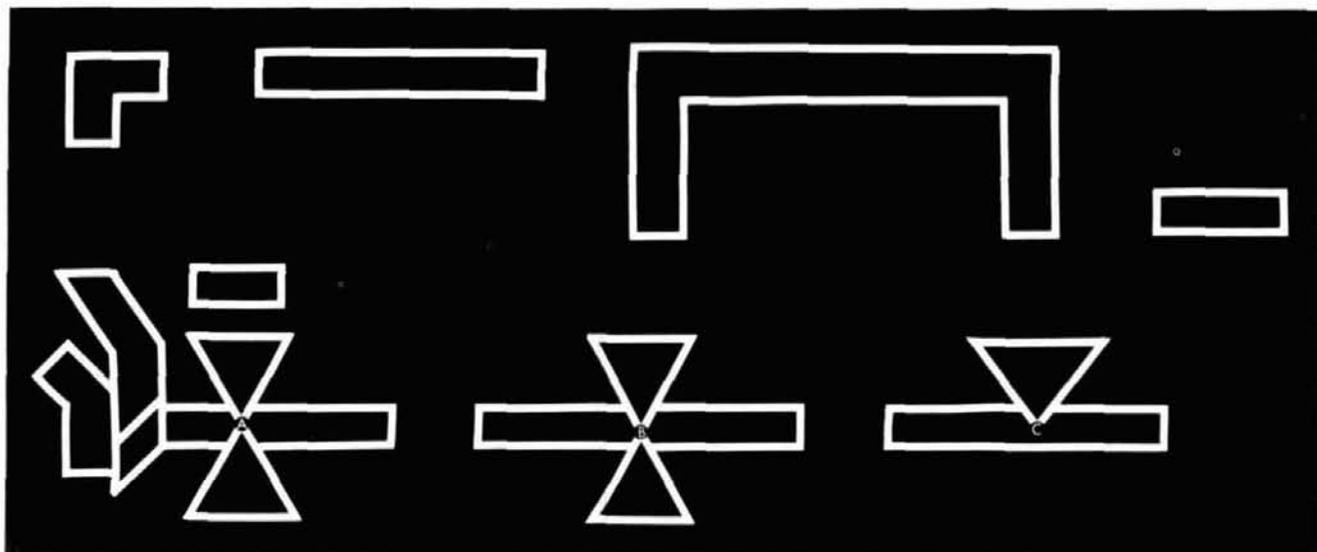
Full-size printed-circuit layout for the 432-435 MHz converter. Component placement for the converter is shown in the photograph. Transistor mounting holes marked A, B, and C are 5/16 inch (8 mm) diameter.
